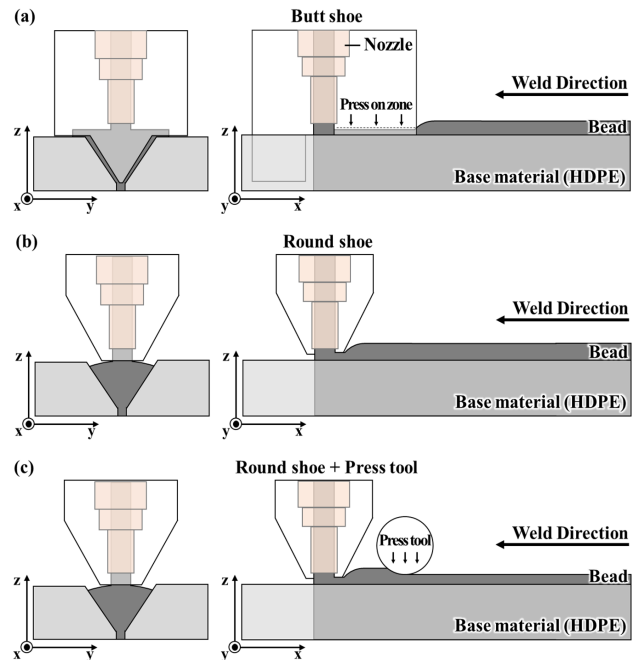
Diagram of welding using (a) butt shoe, (b) round shoe, and (c) round shoe with press tool
